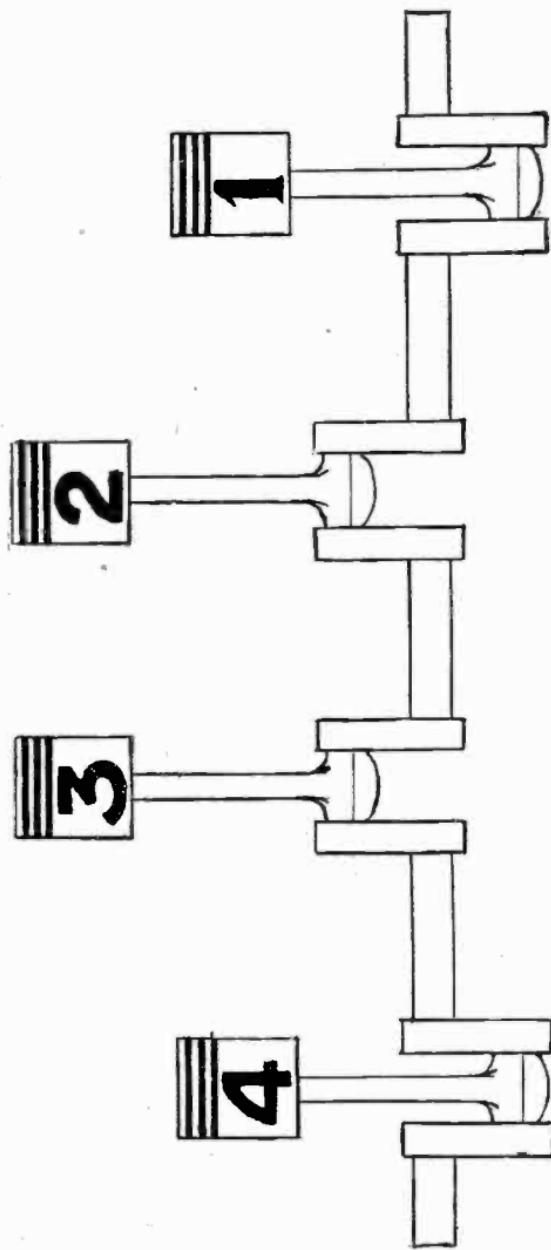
Sequence of cranks of a four cylinder gas engine.
